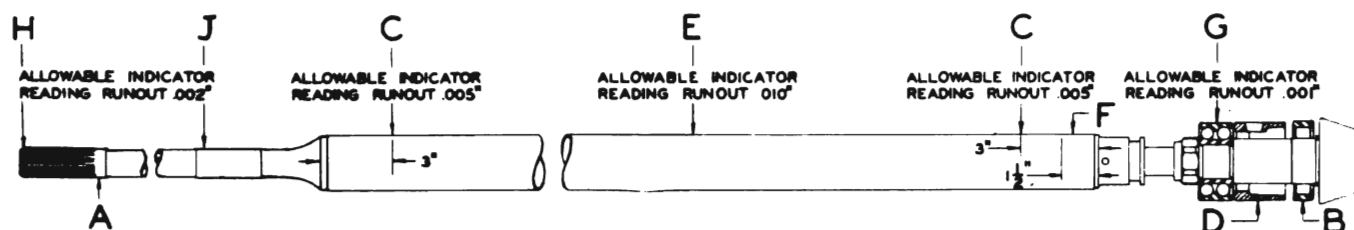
Propeller Shaft Run-Out Specifications—Series 90
